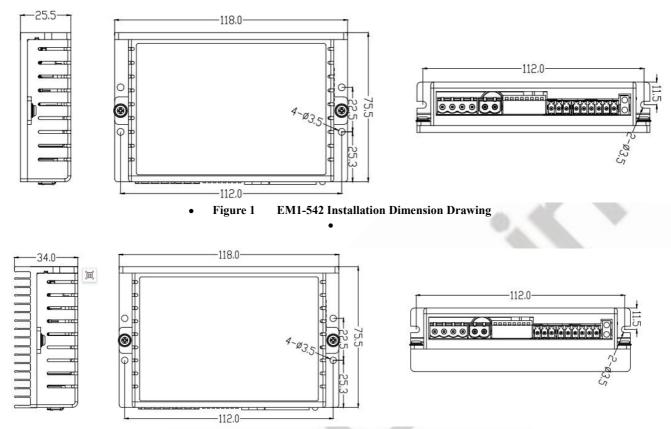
EM1-556,EM1-870 Installation Dimension Drawing
